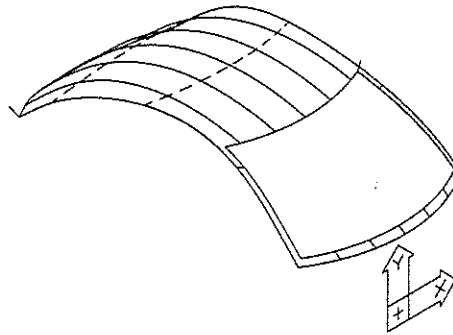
Wires at the rear erased, wires at the front projected to cut an opening
